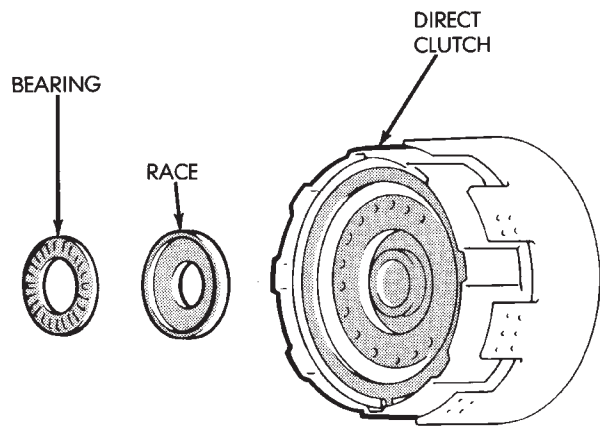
Removing Direct And Forward Clutch Assembly
